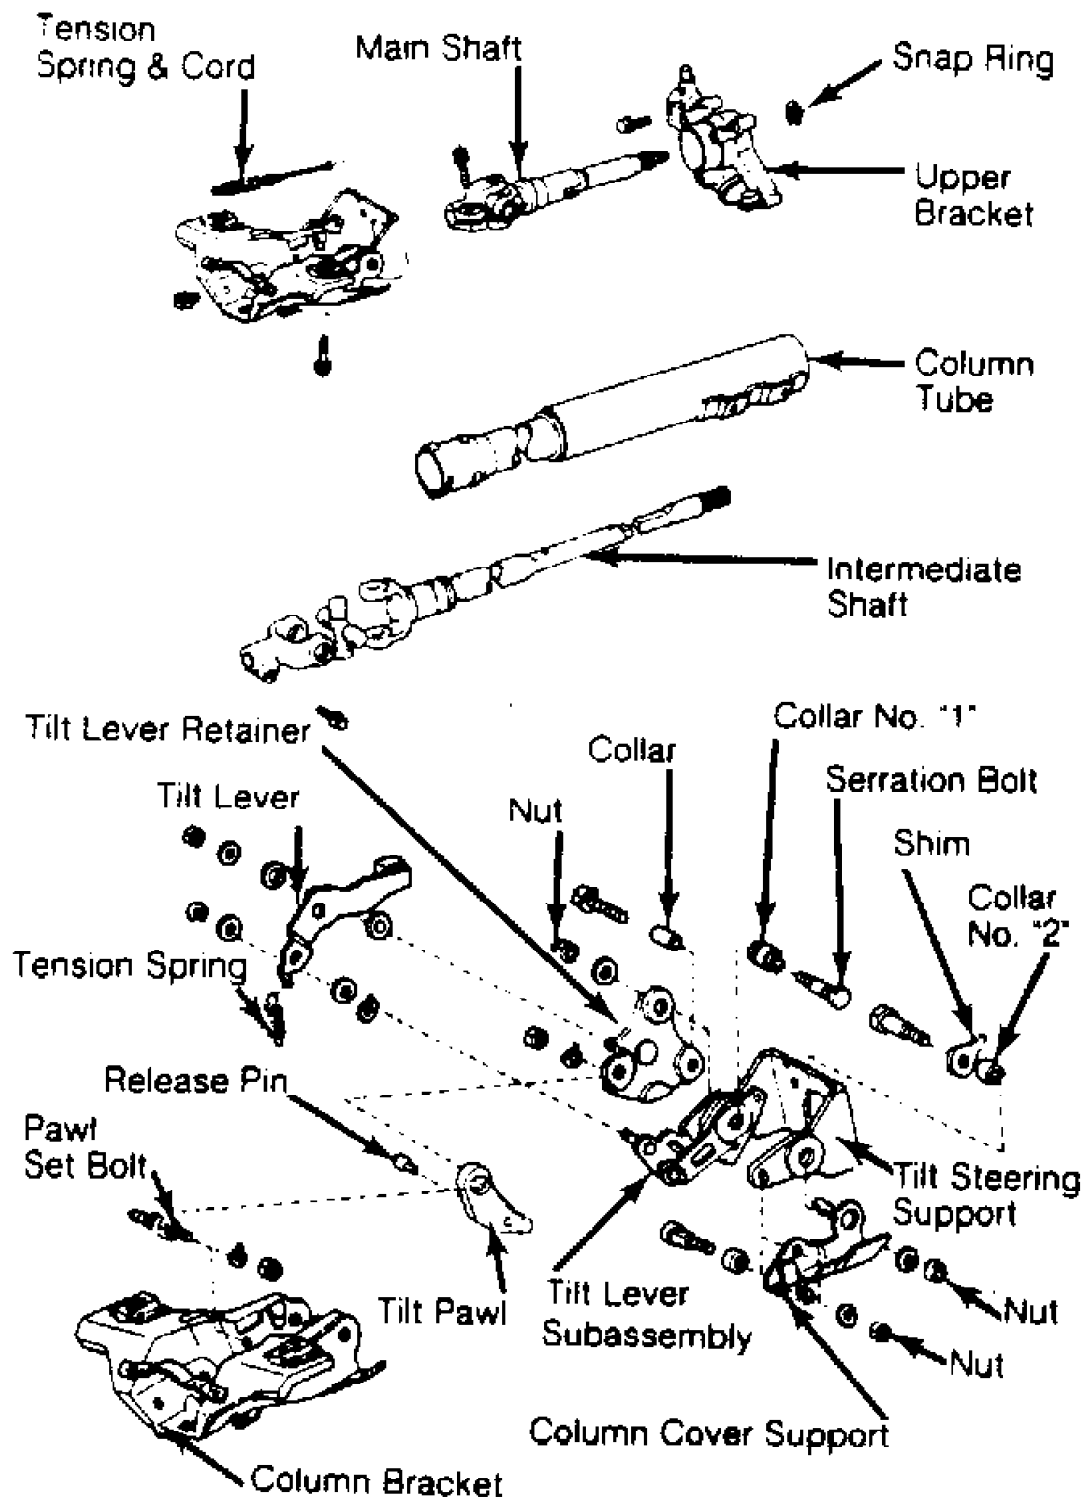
Exploded View of Land Cruiser, Pickup, Van & 4Runner Steering Column Assembly
